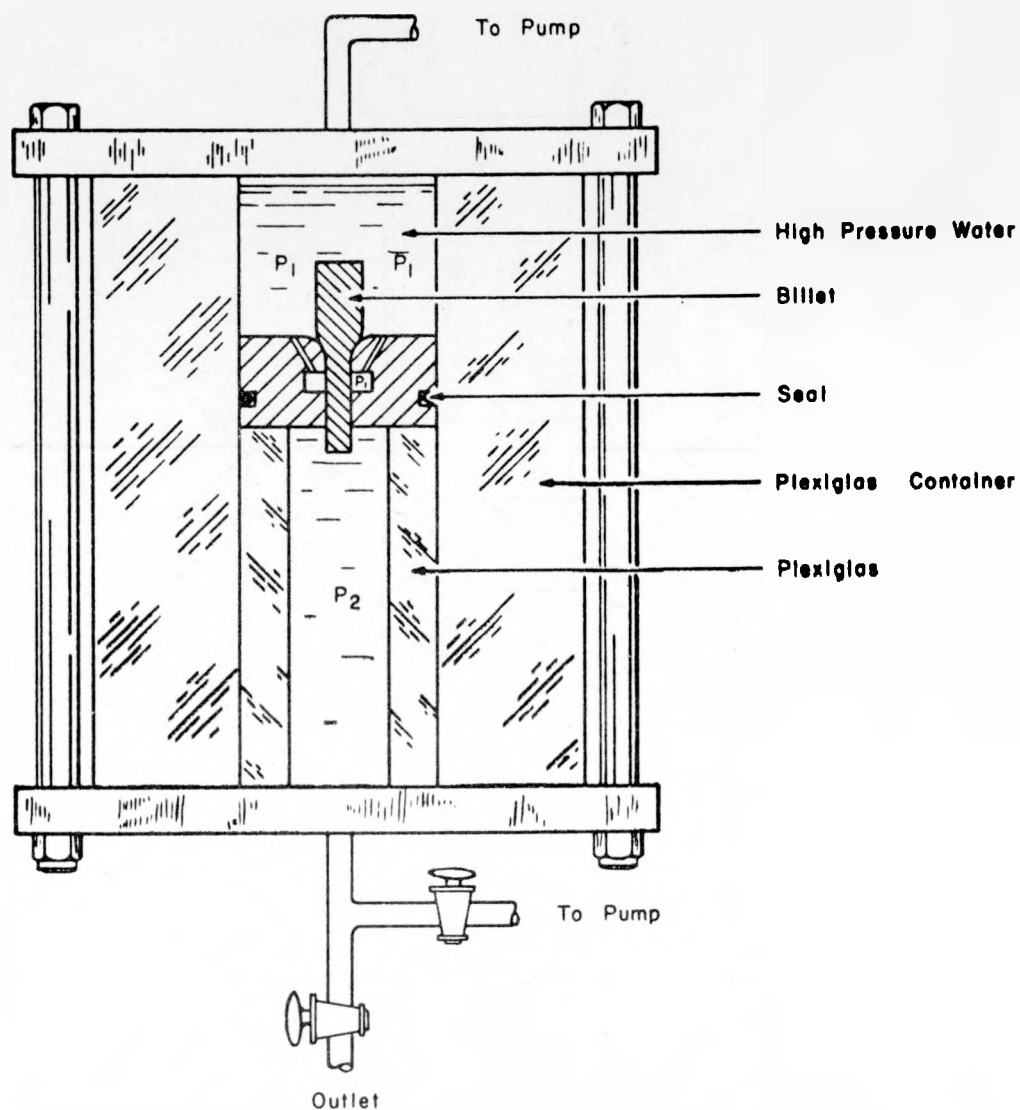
Sketch of equipment used for hydrostatic drawing experiments. Pressure $P_1 > P_2$
